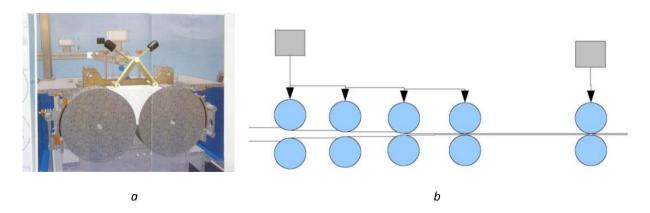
Twin roll casting machine (a), formation (rolling) scheme (b)
